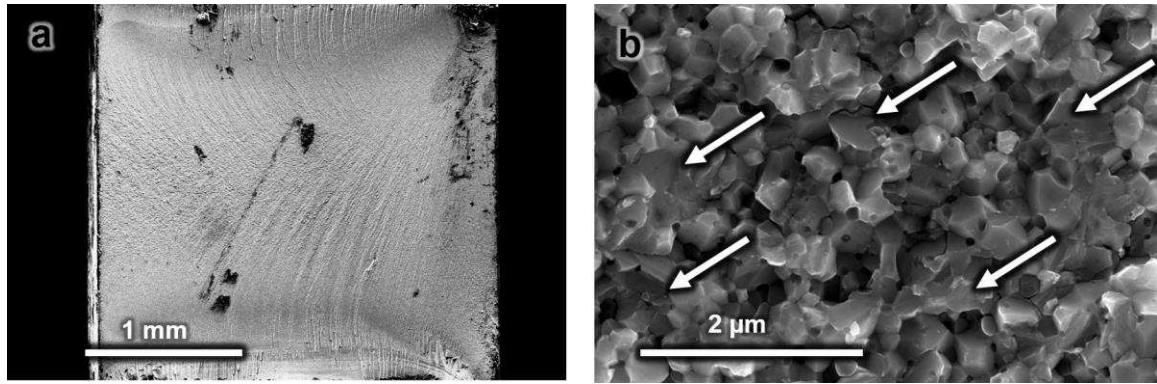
SEM images of fracture surfaces for an Unalloyed ufgW sample tested at high strain rates. Beach marks in a) show that fracture initiated in the upper right corner of the specimen, at the surface. Arrows in b) show signs of transgranular fracture.
